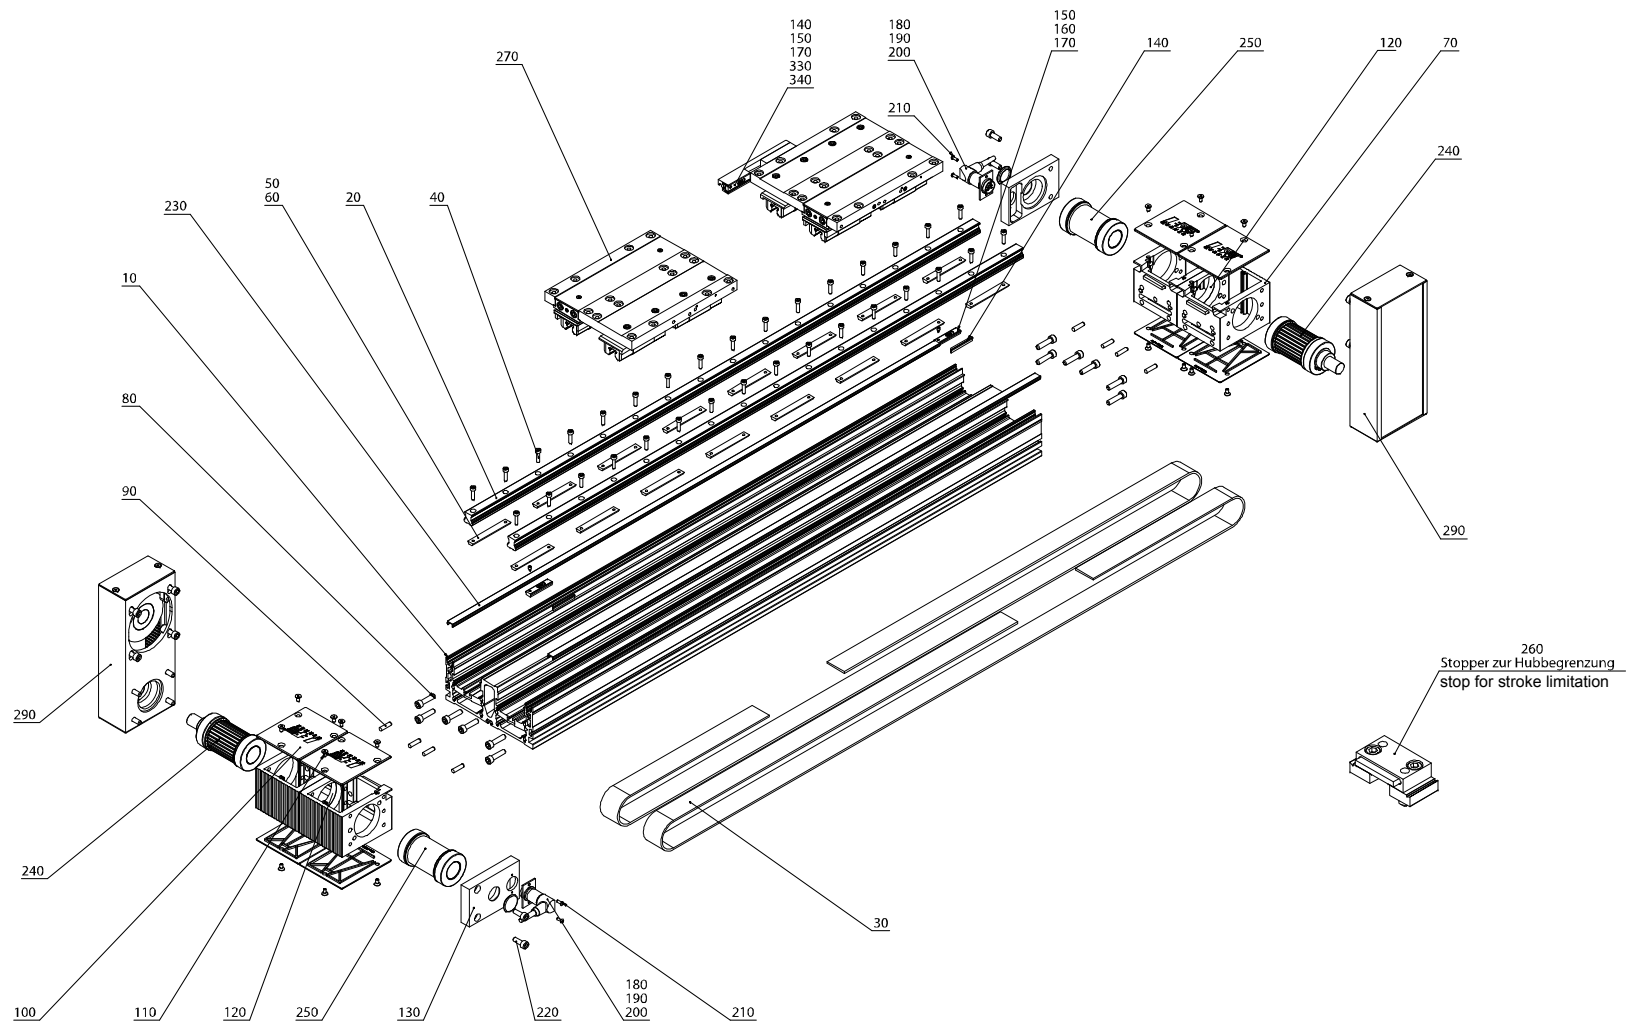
Linear drive unit 160/15 G with toothed belt gearbox
